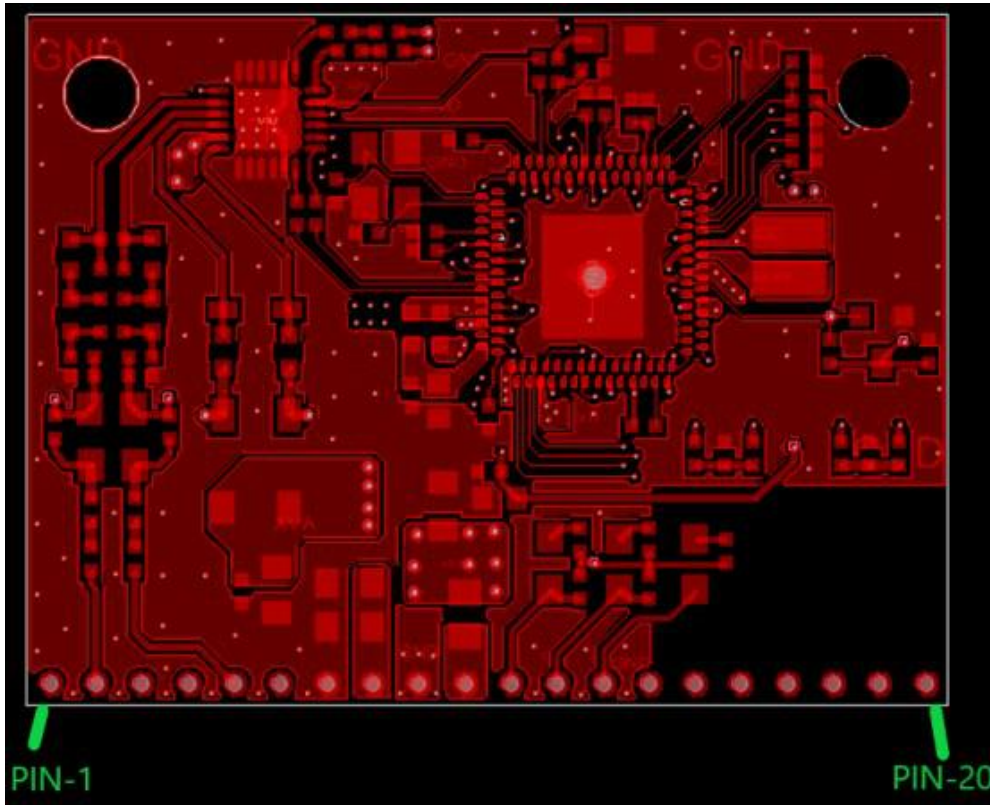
Size of PCB LAYOUT of LX200V30 Module
